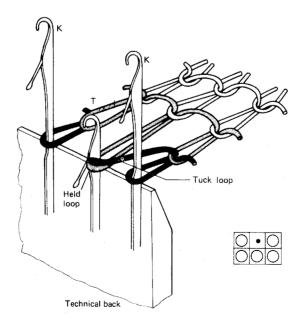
Tuck stitch produced on a latch needle machine.
